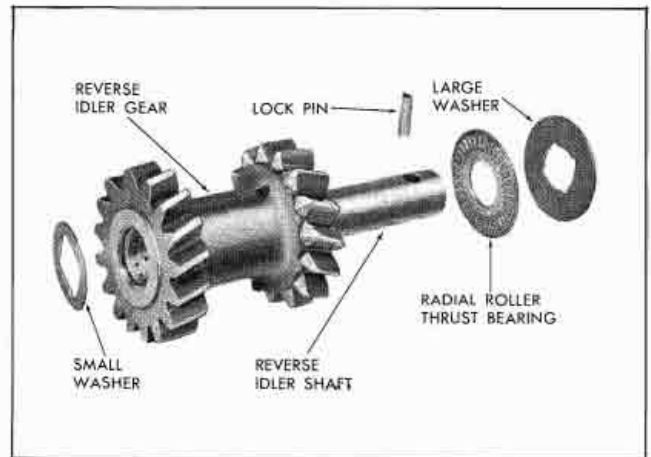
Reverse Idler Gear, Shaft and Thrust Washers
